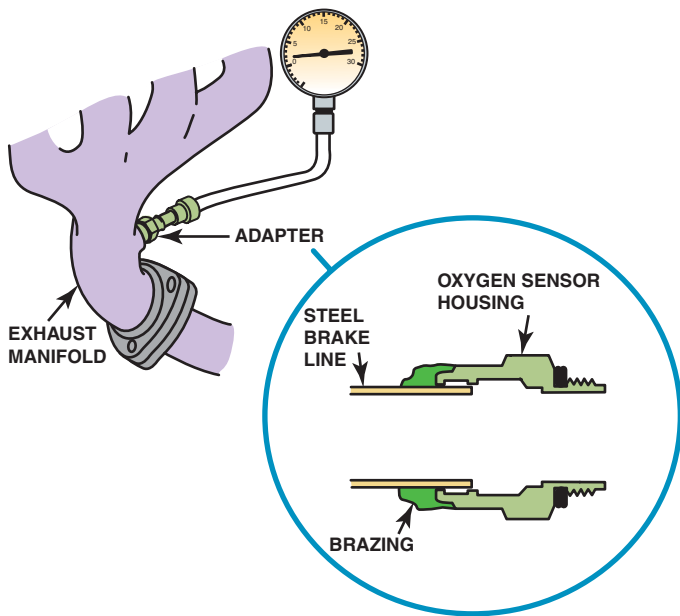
A back pressure tool can be made by using an oxygen sensor housing and epoxy or braze to hold the tube to the housing.
